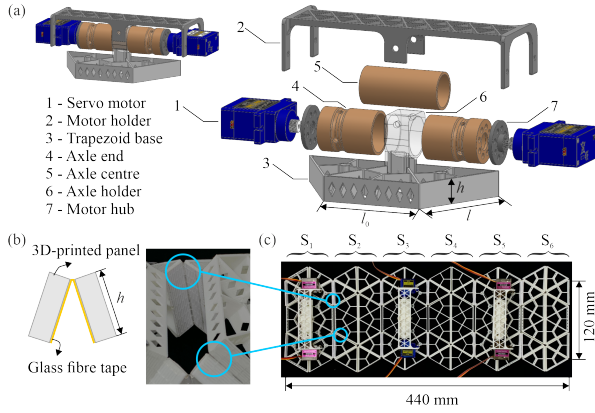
Fabrication of a six-segment millipede-like robot. (a) Schematic design of the driving axle. (b) Fabrication of fold connections between panels. (c) Completed prototype of the robot with three actuated segments.
